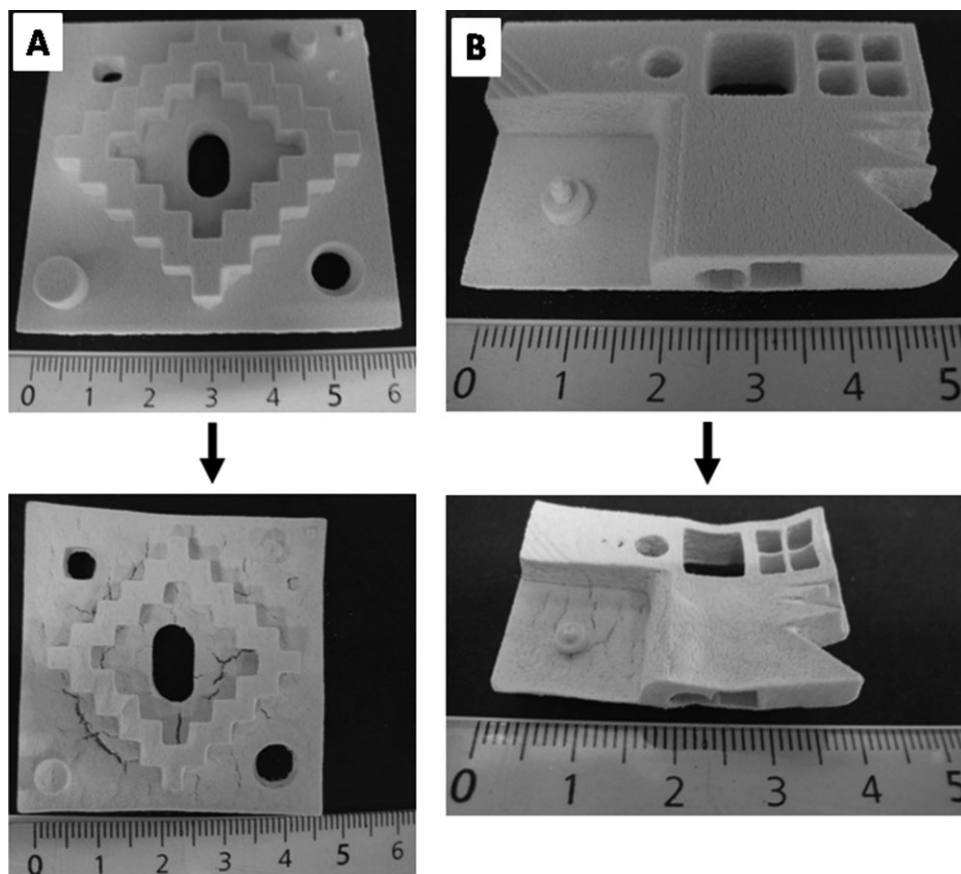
Large geometrical test parts (A, B) before (top) and after (bottom) debinding and sintering.
